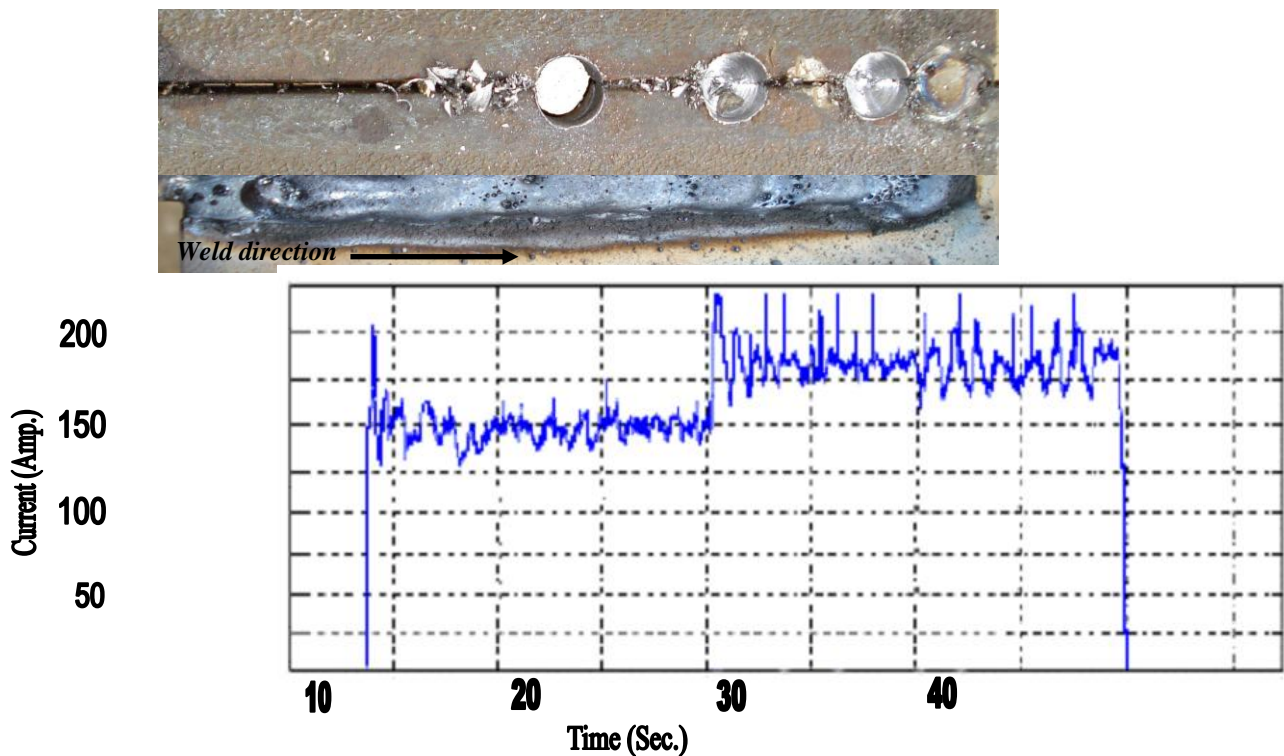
Monitoring Defect in Welding (Hard Particle)
